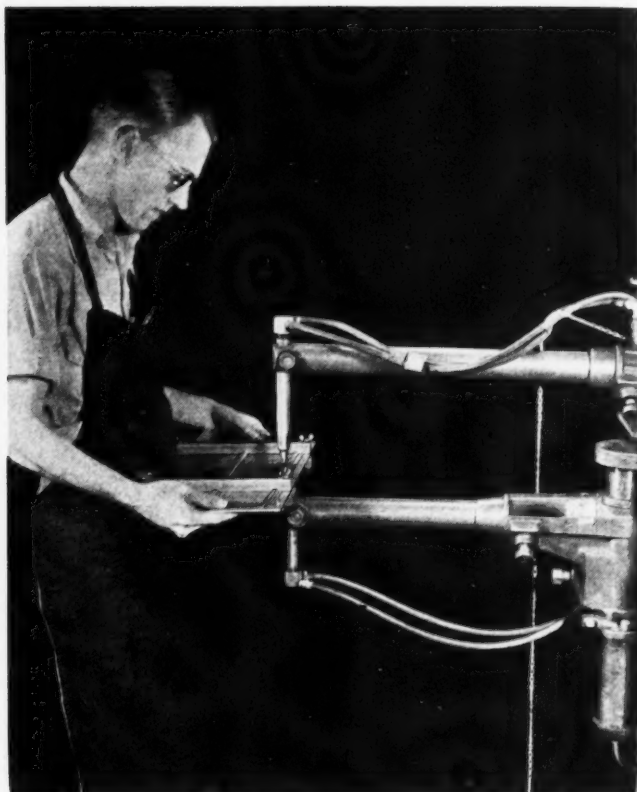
Jig that Consists of a Copper Plate and Four Bars which Locate and Clamp Pieces to be Welded
